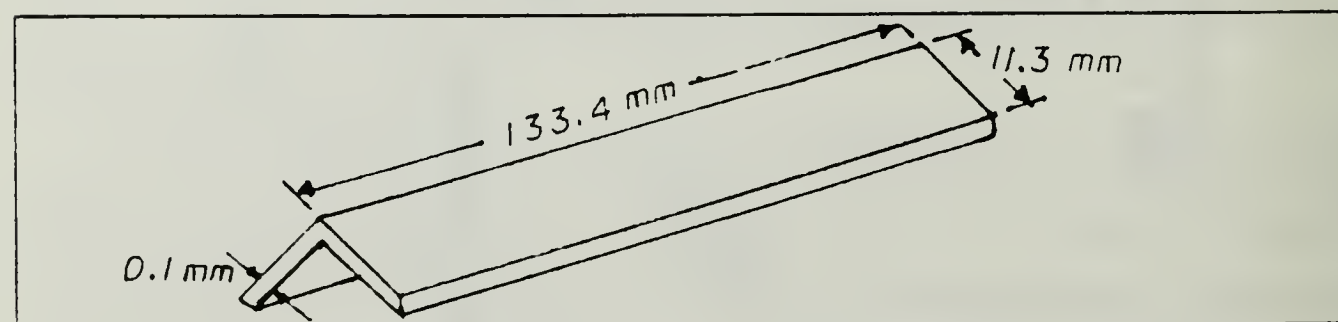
Geometry of Inverted V-Shaped Steel Strip.
